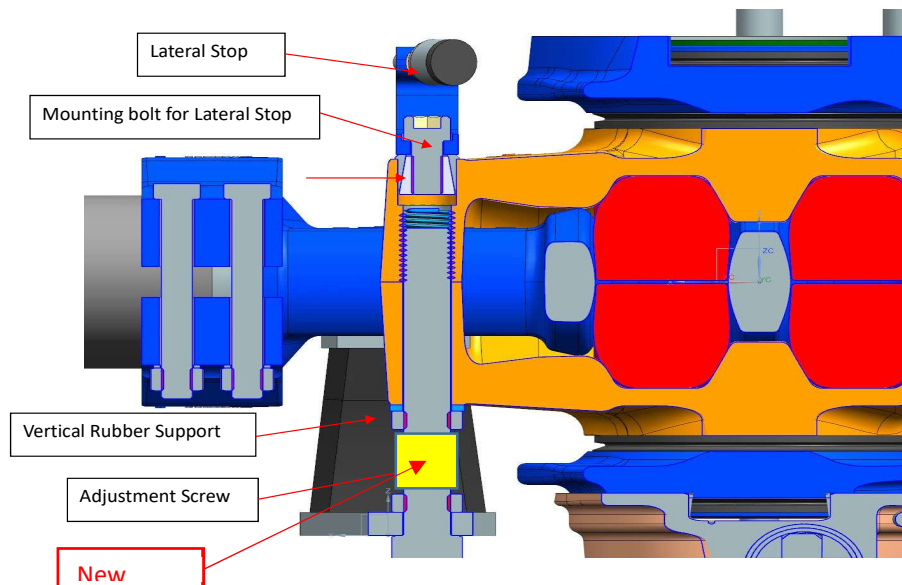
Cross Section through Coupler Bearing Housing with Proposed Sleeve
